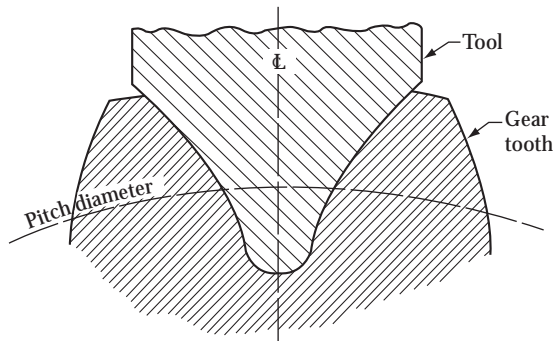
Milling tool fits space between gear teeth exactly after gear is finished.
